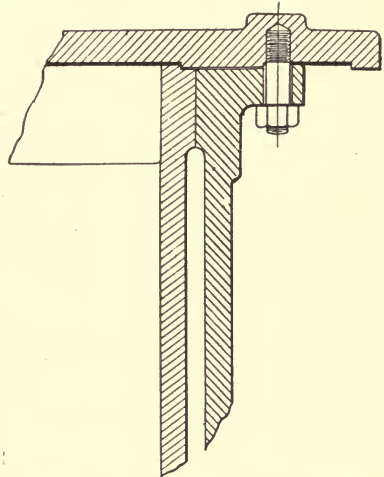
Enlarged Section of Upper End of Cylinder and Jacket.
